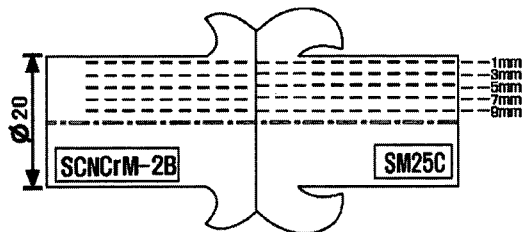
Hardness measurement point of perpendicular direction from the welding section
